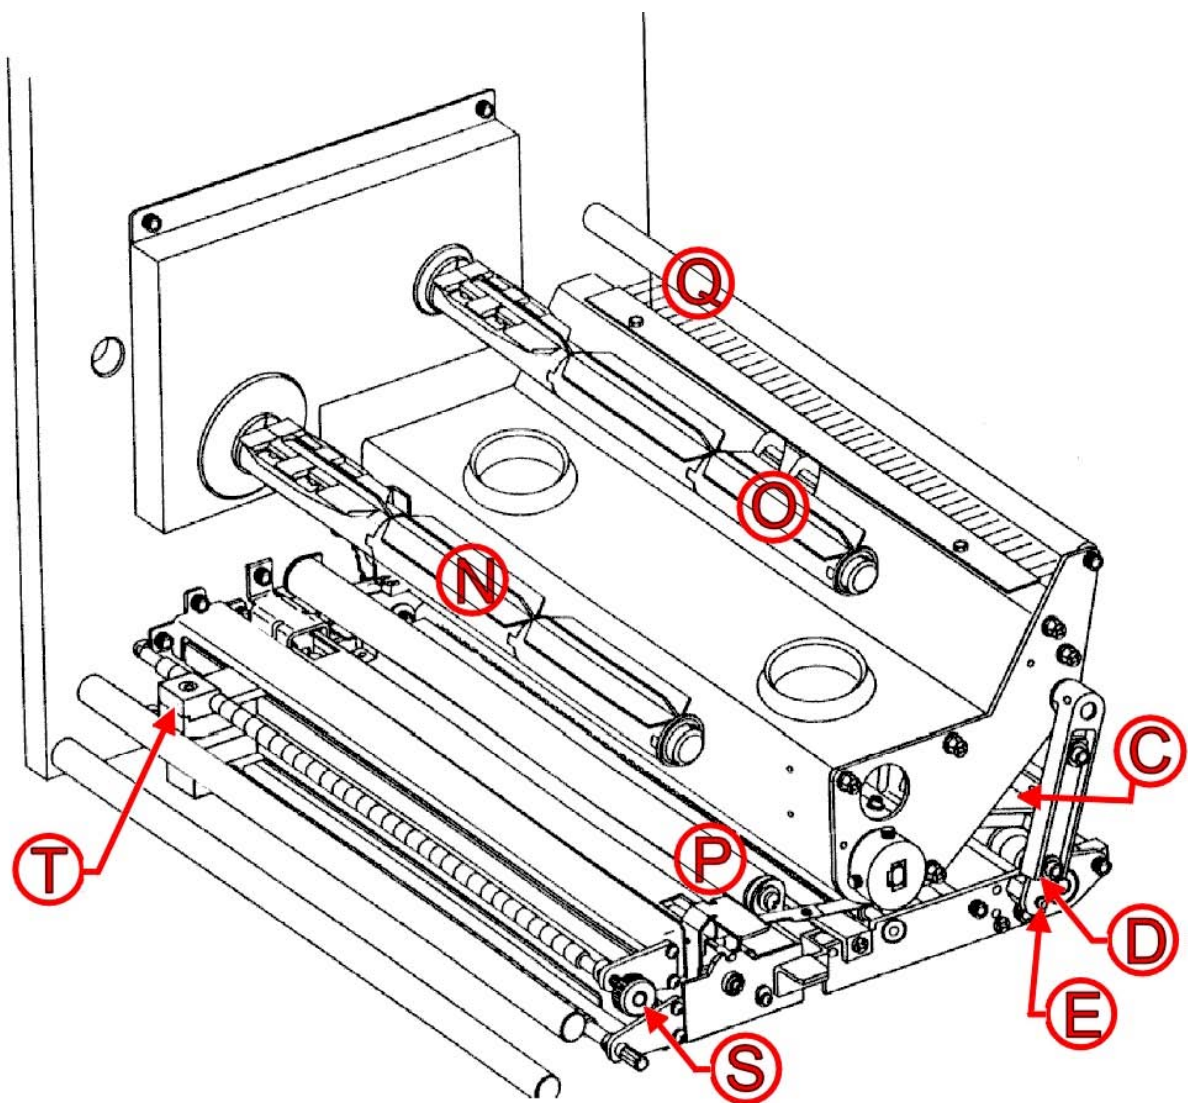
Annotated parts of the Zebra Print Engine. 3D view
